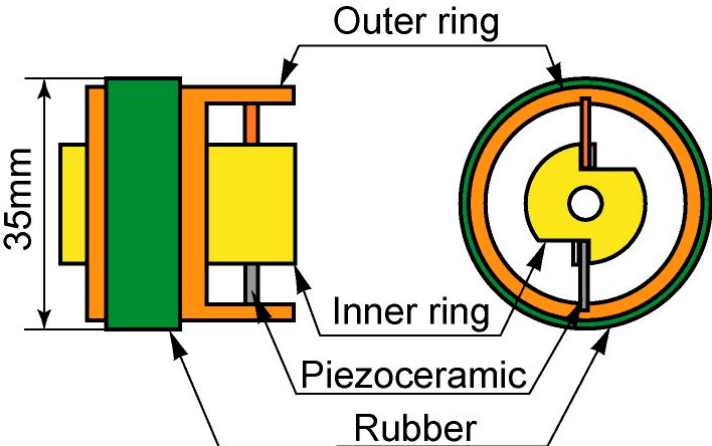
Schematic of the tactile sensor integrated roller (Roller type I)
